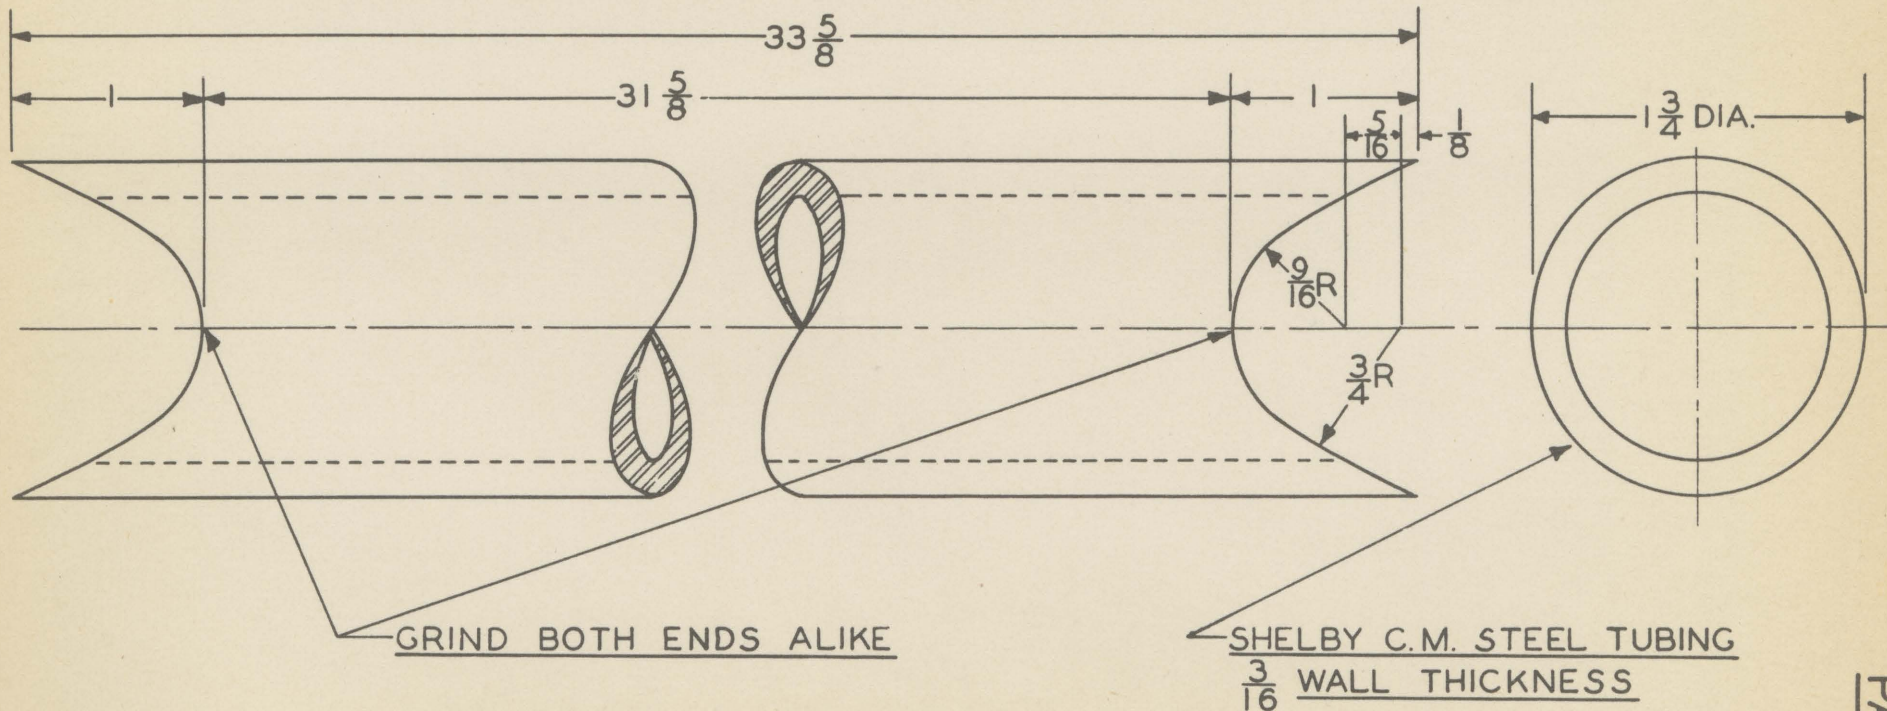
SPREADER BAR—LANDING GEAR BUNGEE
